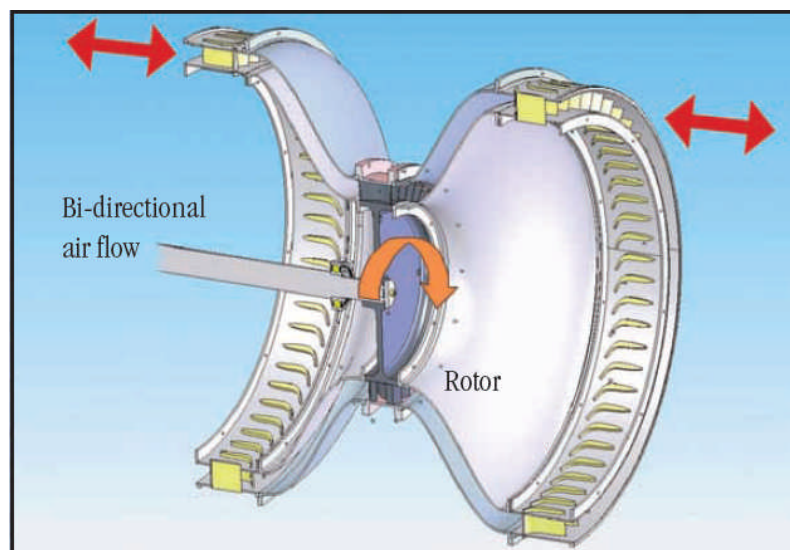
CAD drawing of cut away datum turbine CT14b (Dresser Rand, 2009)
